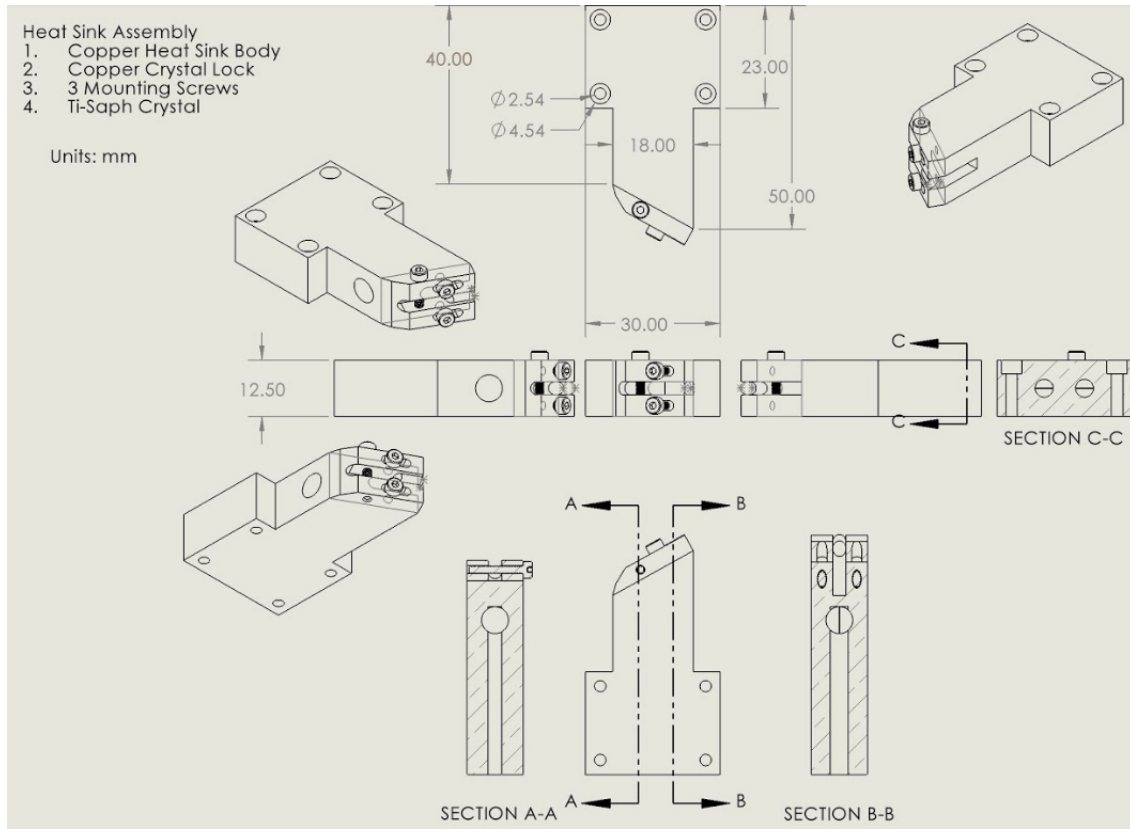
Heat sink subassembly drawings. Designed in metric, the various views show the clamping mechanism for the crystal, one vertical screw passing through the custom 29.6° U-clamp, as well as the two screws to fix the mount onto the OFHC copper heat sink, the four through holes for mounting the heat sink, as well as the bored channels for cooling
